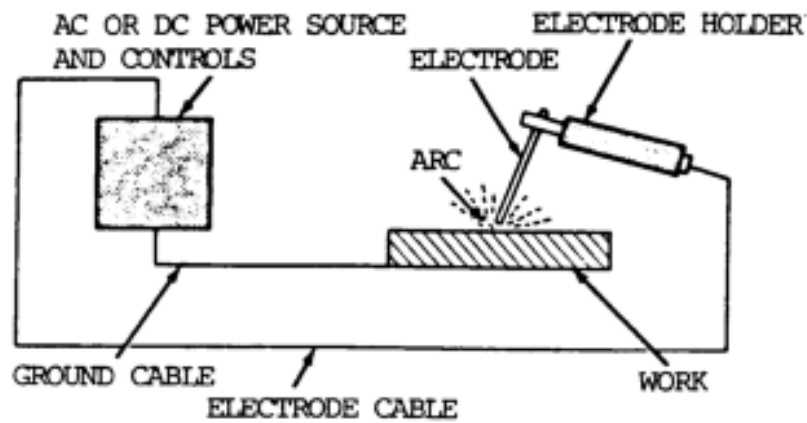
Elements of a typical welding circuit for shielded metal arc welding.
